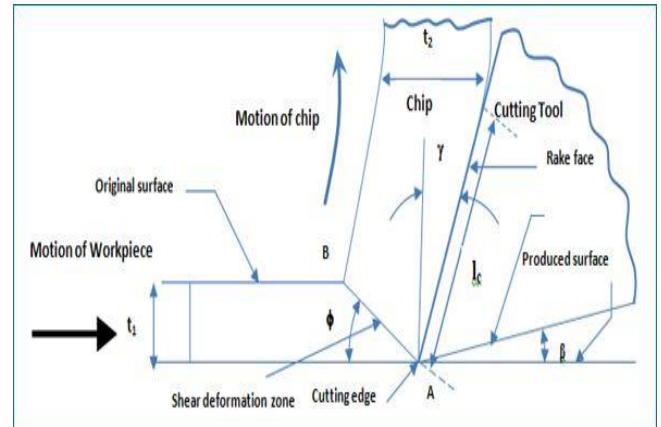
Schematic illustration of two dimensional orthogonal cutting
